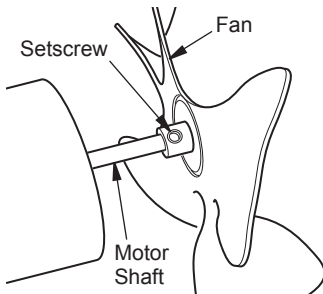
Fan, Motor Shaft, and Setscrew Location
